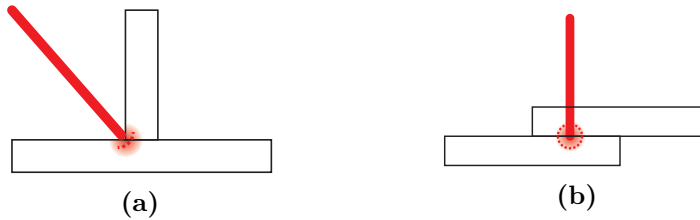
Visual representation of two welding methods, with (a) showing the butt joint welding of two parts that are positioned perpendicular to each other and (b) showing TTir welding of two overlapping sheets.
